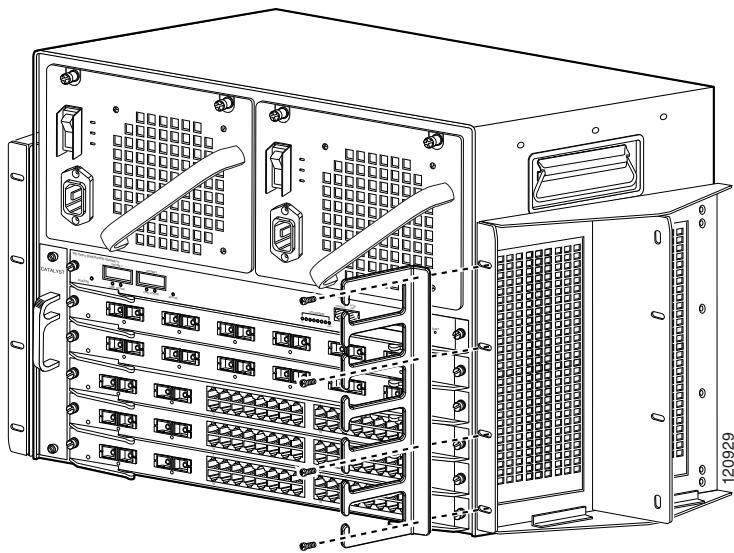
Attaching the Cable Guide to the Catalyst 4507R Switch
